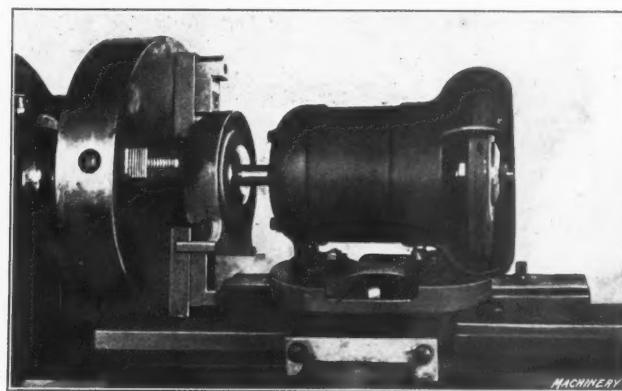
Grinding Attachment working on an Internal Grinding Operation
